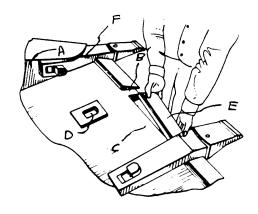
A - Bucket side wall; B - Bucket lip or projection; C - Bucket pad; D - Bucket slot; E - Wear element; F - Corner adaptor
